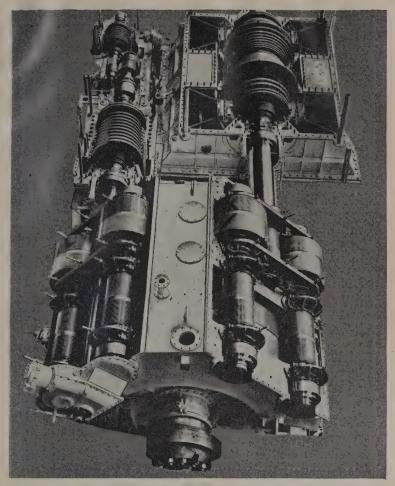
Steam turbine and reduction gear with casings removed.
